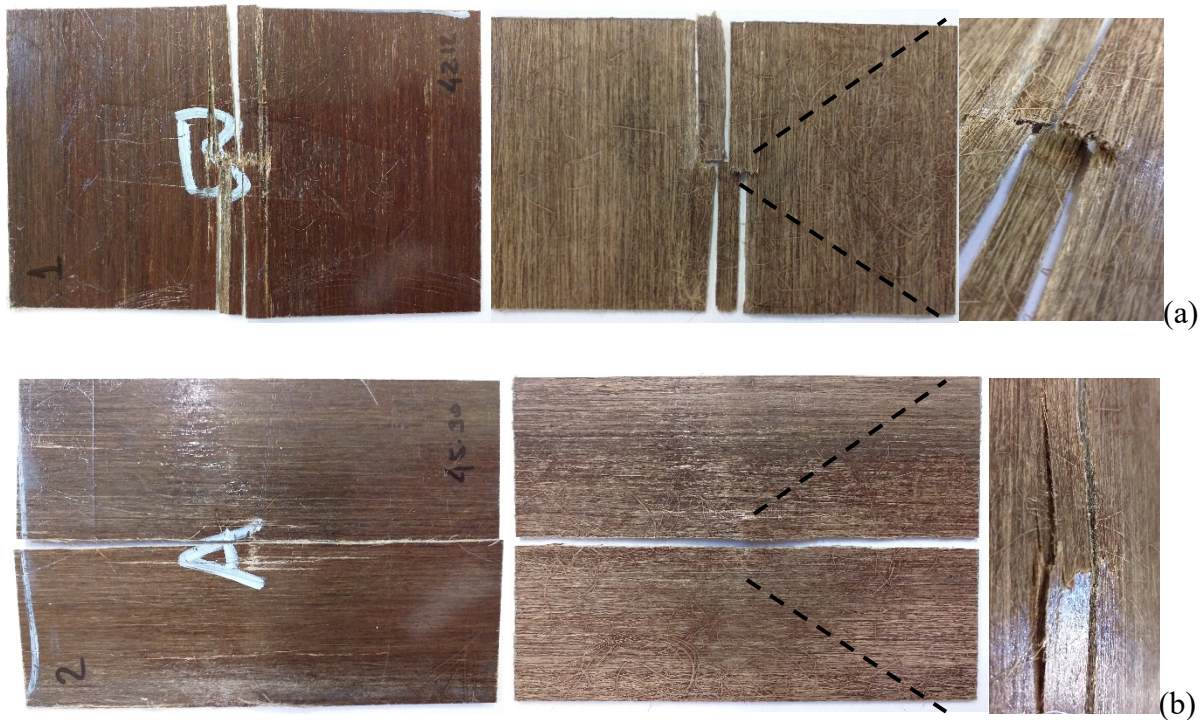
Impact specimens after testing: (a) transverse and (b) longitudinal fibre directions.
